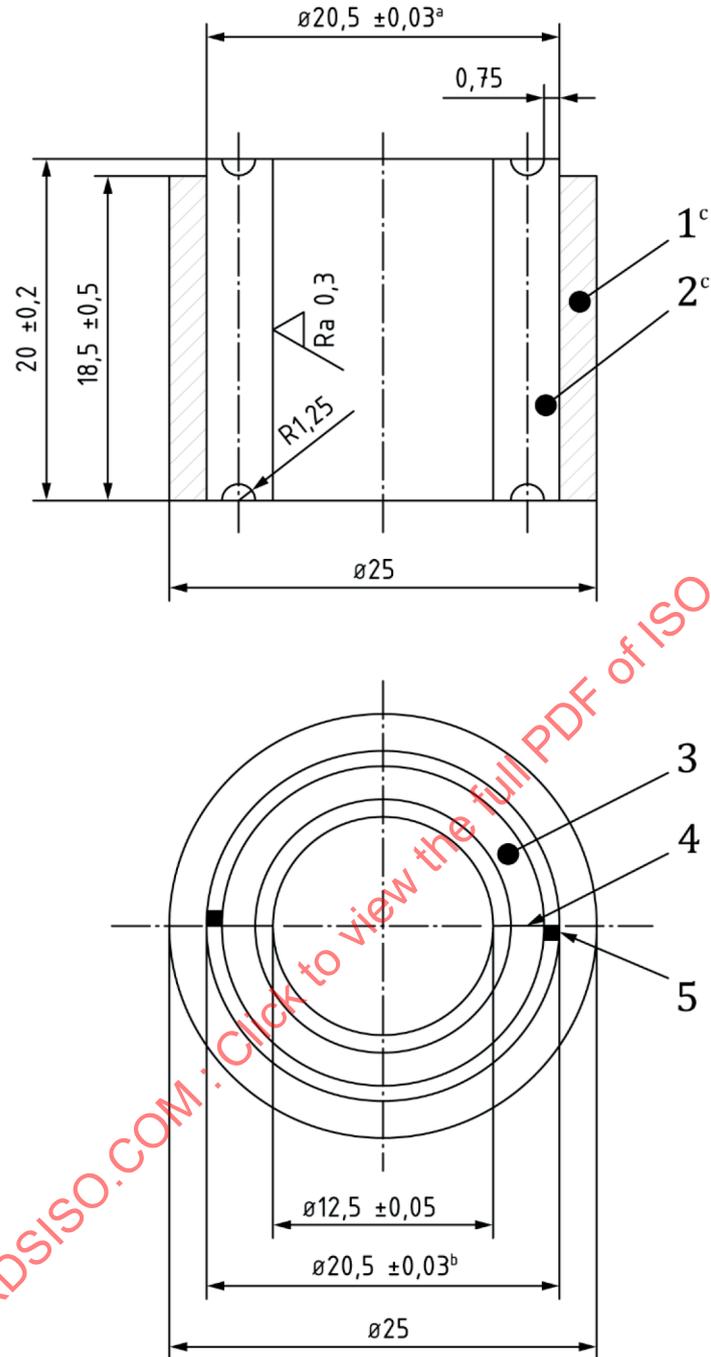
Specimen forming mould — Elastic recovery test, Type 1 materials
